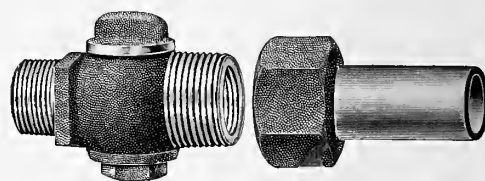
STRAIGHT COUPLING FOR PAYNE MACHINE.
